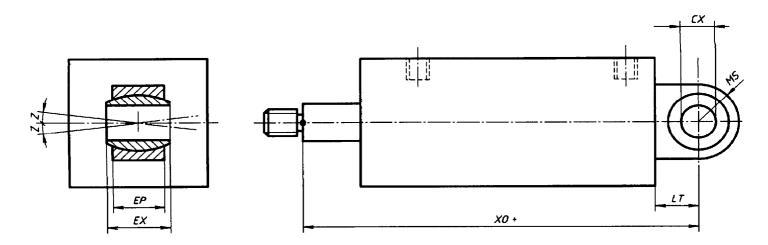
MP5 — Cap mounting, fixed eye with spherical plain bearing
